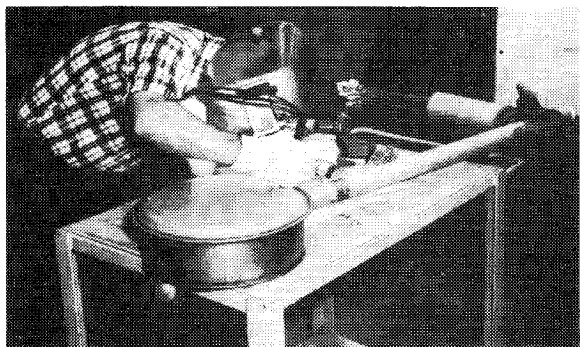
Laminated wheel blank retort being welded after backfilling with argon.
